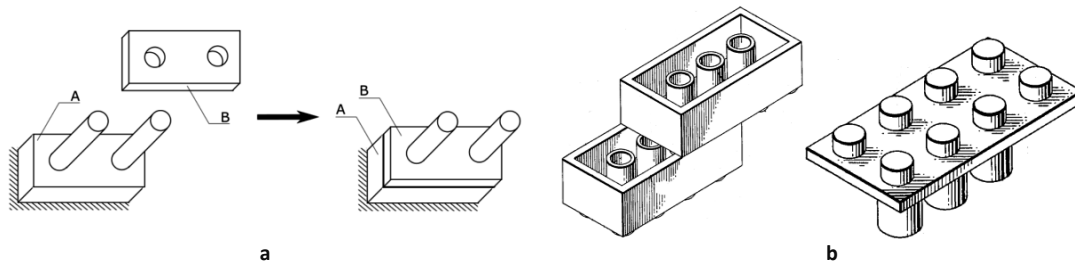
a) A dowel pin assembly, b) An assembly making use of elastic averaging, as used in LEGO®, image adapted from [17].
